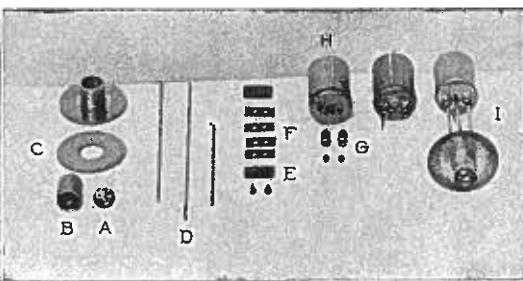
PARTS OF CATHODE OF UNIVERSAL TYPE TUBE AND VARIOUS STAGES OF ASSEMBLY. *A*, filament; *B*, molybdenum tube; *C*, molybdenum disc; *D*, leads; *E*, metal clamp; *F*, mica washers; *G*, bushings; *H*, support tube; *I*, assembly.
